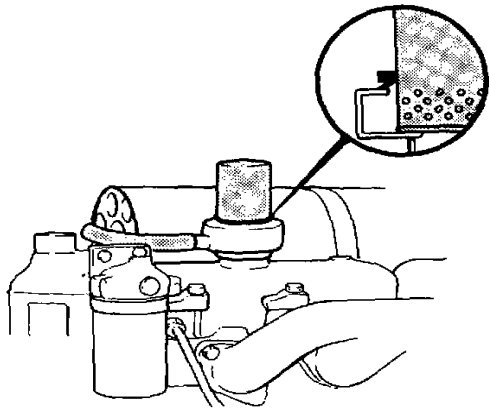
Crankcase ventilation, industrial engines (optional equipment)
